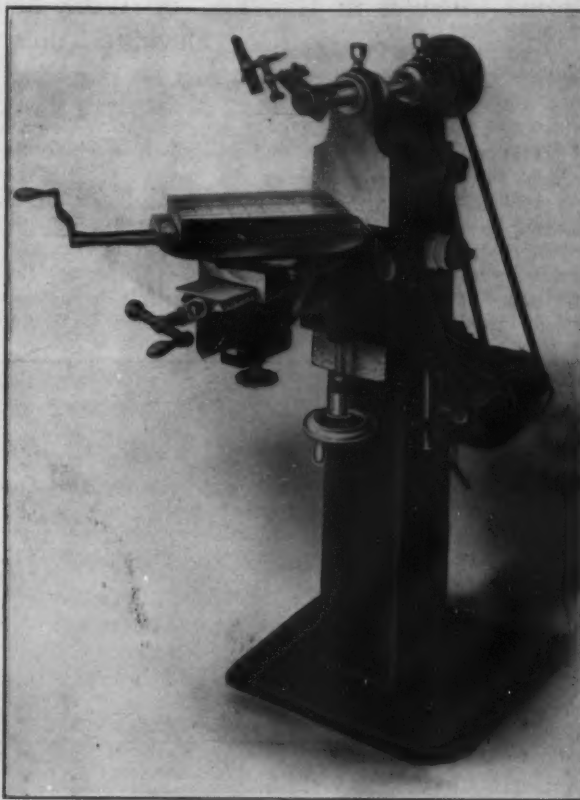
The No. 3 Universal Cutter and Surface Grinding Machine.
